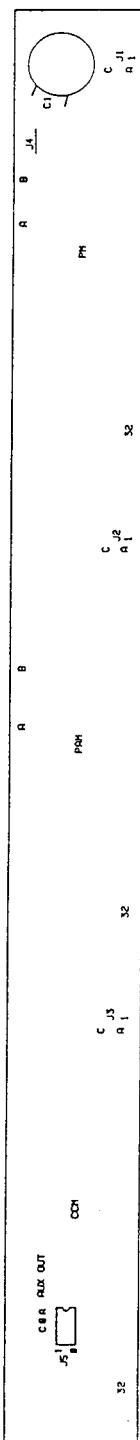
Component locator drawing, RFL 9720 2TMB Motherboard (two-terminal configuration for 3U or panel-mount chassis)
